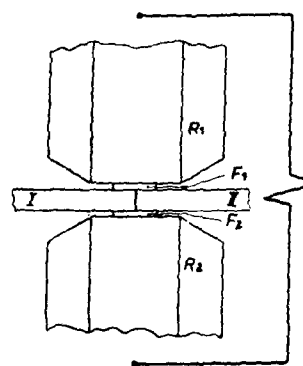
Foil butt seam welding I and II sheet metals to be welded together F 1 and F 2 foils R 1 and R 2 electrode rolls.
